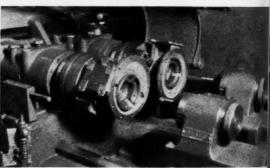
Shaft bearing holes in compressor bodies are bored this "Heald Red Head" diamond boring machine. The hole are finished to 3.505 in. within a tolerance of 0.0003 in
